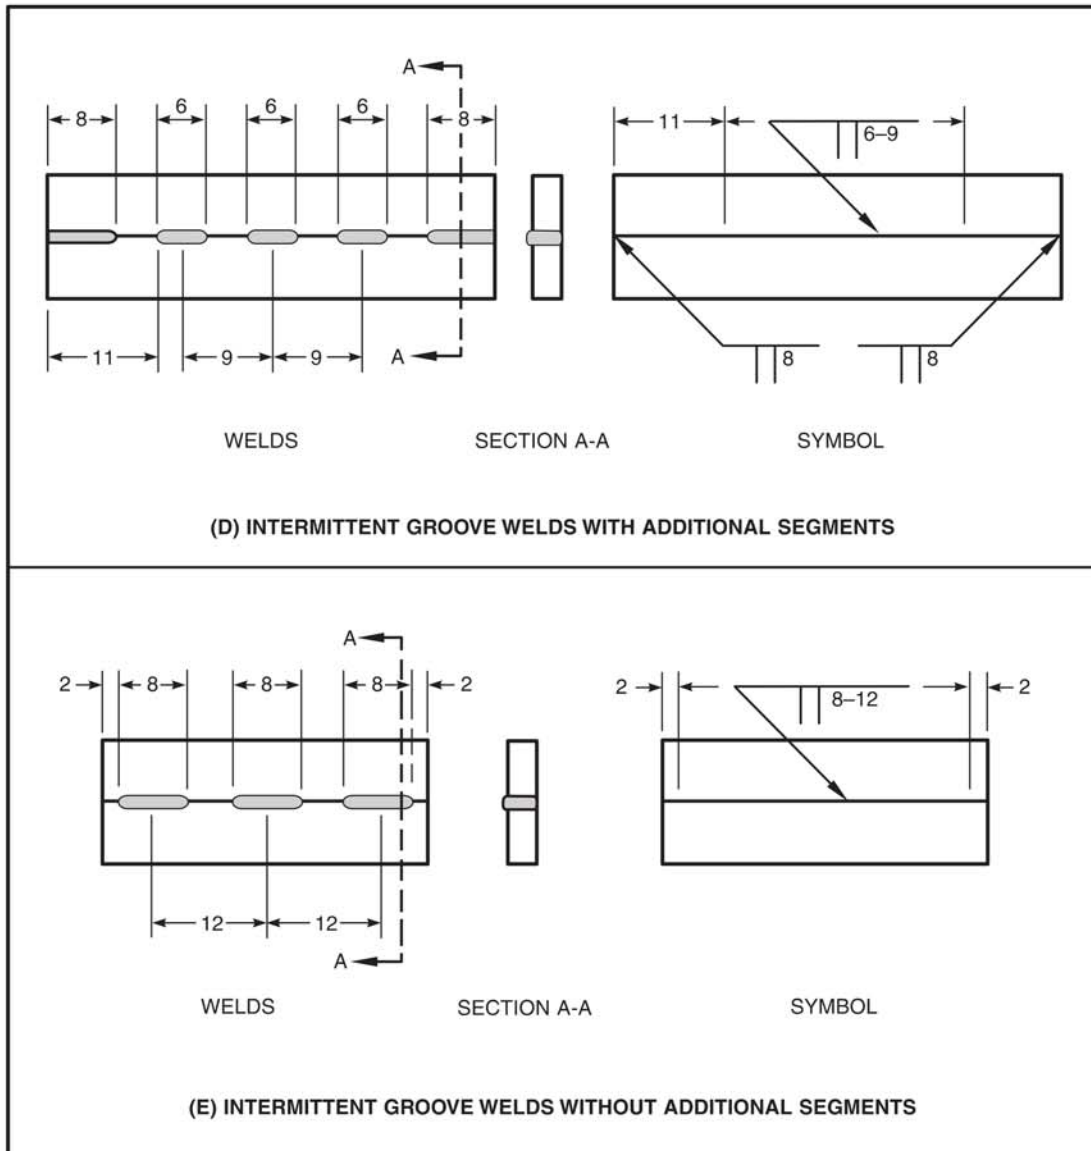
(Continued)—Application of Intermittent Groove Welds
